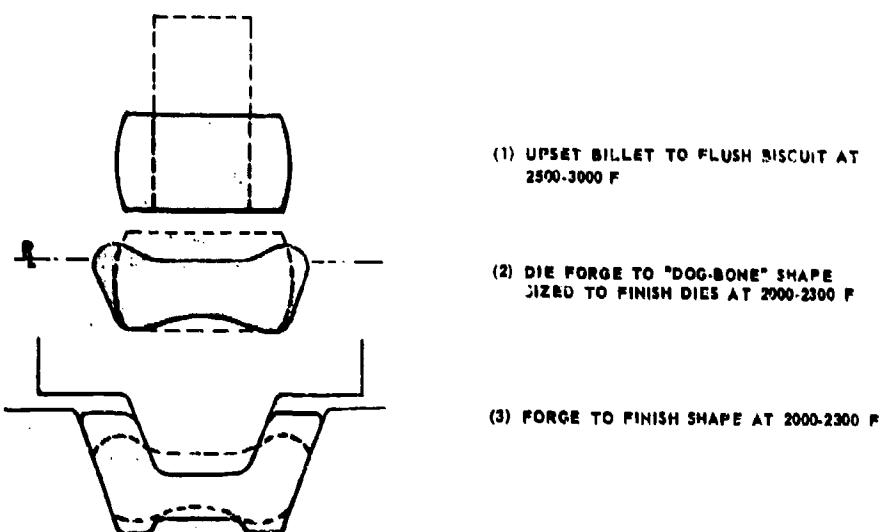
PROBABLE DIE STAGES IN FORGING PRESSED AND SINTERED TUNGSTEN FOR TYPE B FORGING DESIGN
